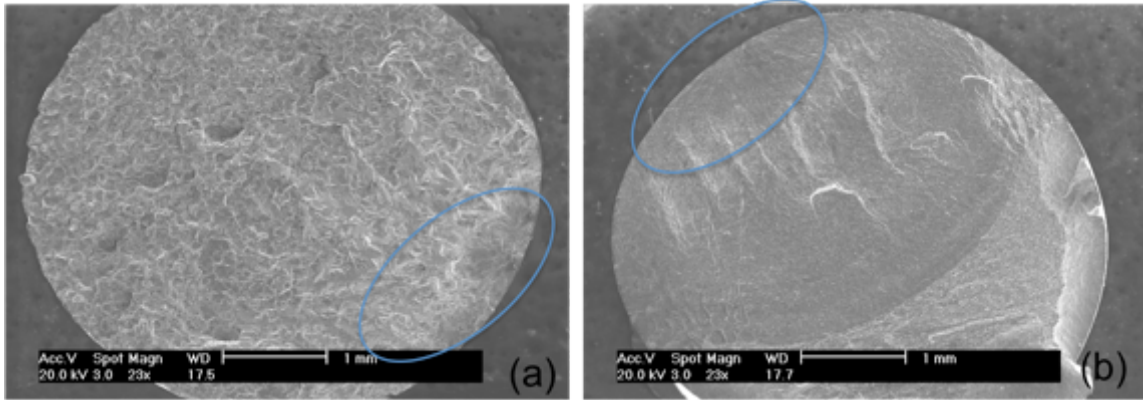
Fracture surfaces of (a) as-cast A206; (b) FSPed A206.
